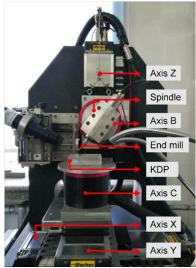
Images of the homebuilt 5-axis vertical spindle machine tool.
